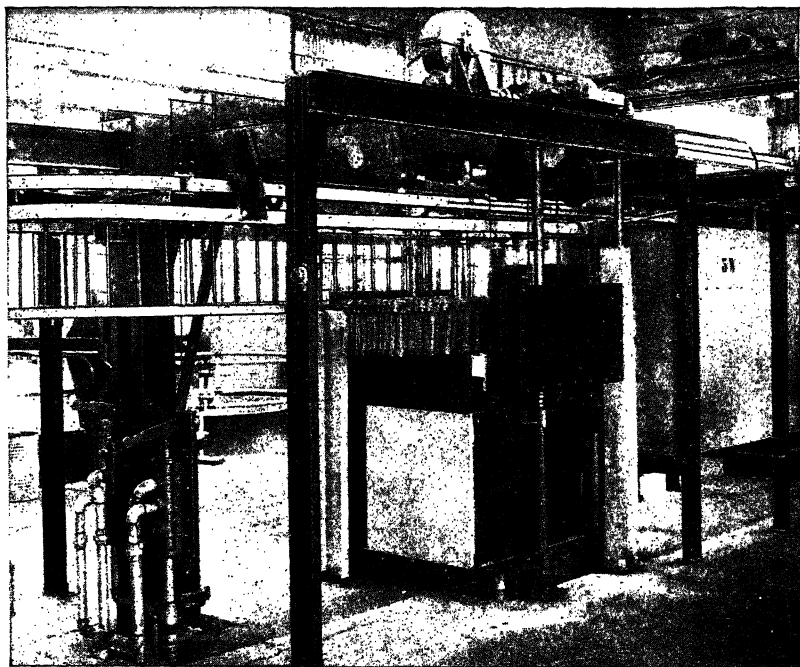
Elevator quenching installation in conjunction with overhead chain conveyor type furnace for heat treatment of aluminum connecting rods for motors.
